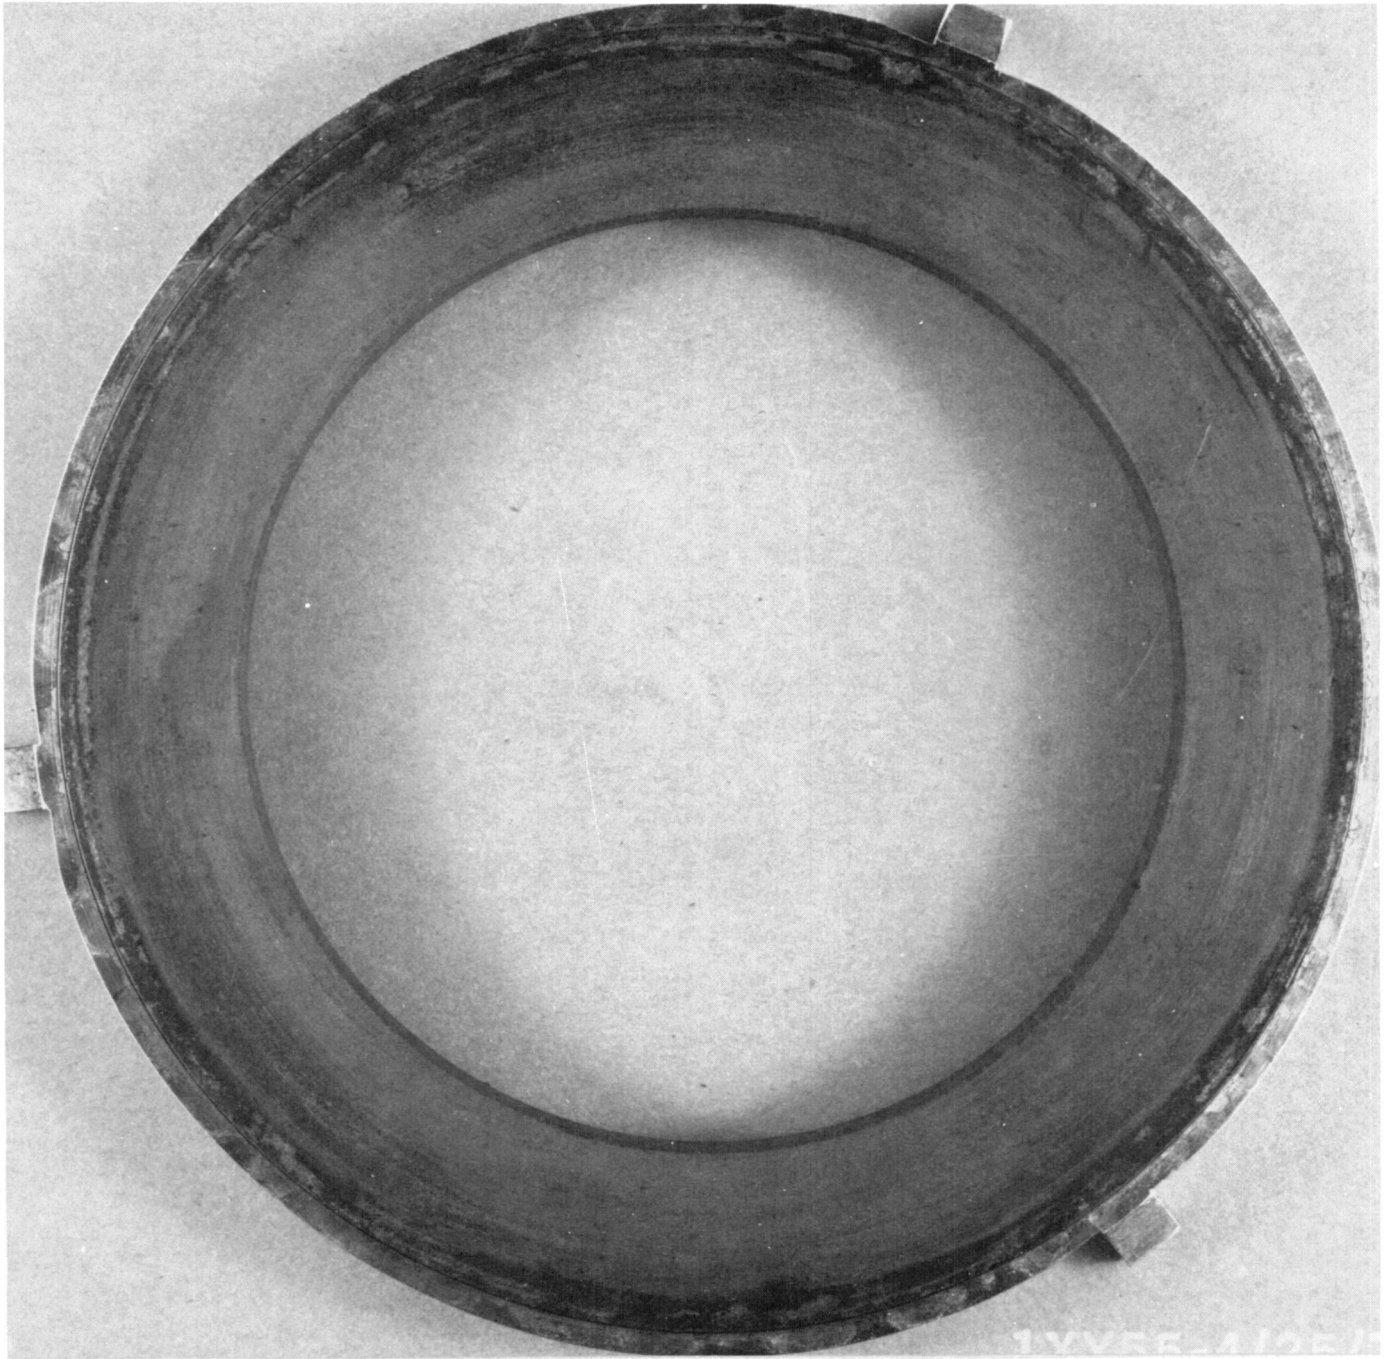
Spiral Groove LOX Seal Carbon Seal Ring SSCY 6888-1, S/N 01,
